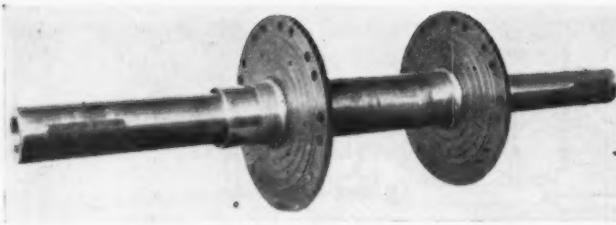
HEAD SHAFT WITH SPROCKET-WHEEL CENTERS, WITHOUT TEETH
